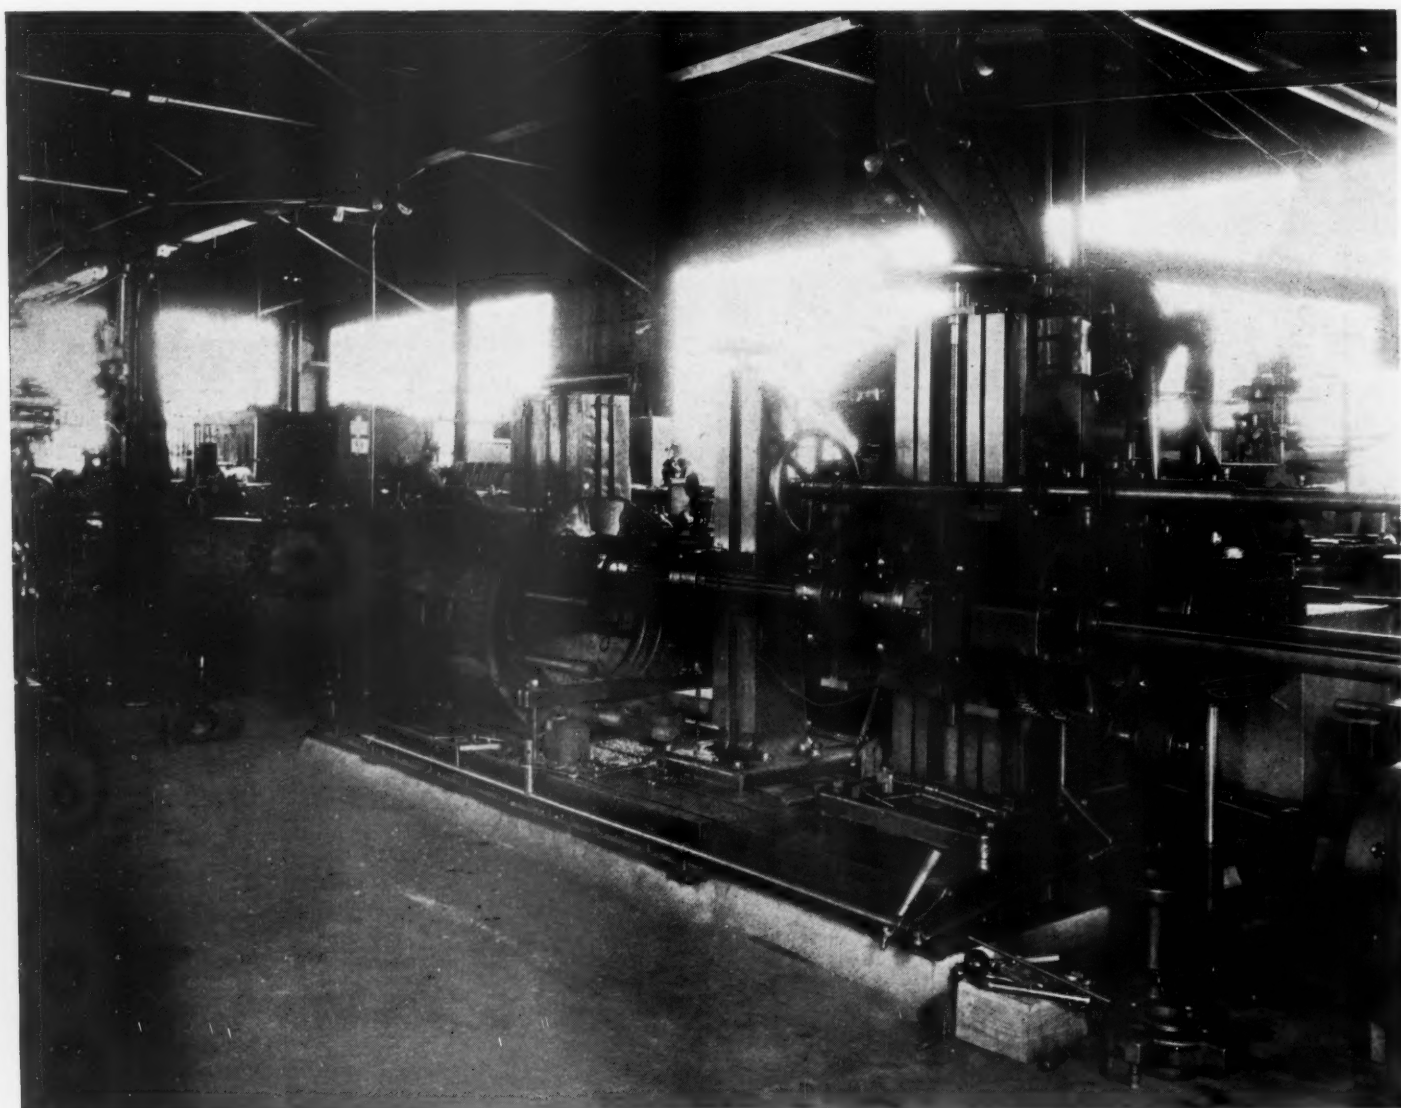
How Texas cement plant repaired large A-frame of engine damaged when crankshaft broke. A view of the engine is shown in Fig. 13
